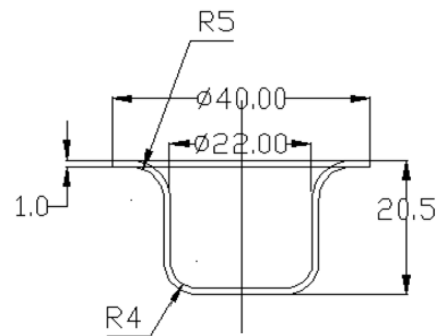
Example Component (All dimensions in mm; Sheet material: M.S, Sheet thickness: 1.0 mm)
